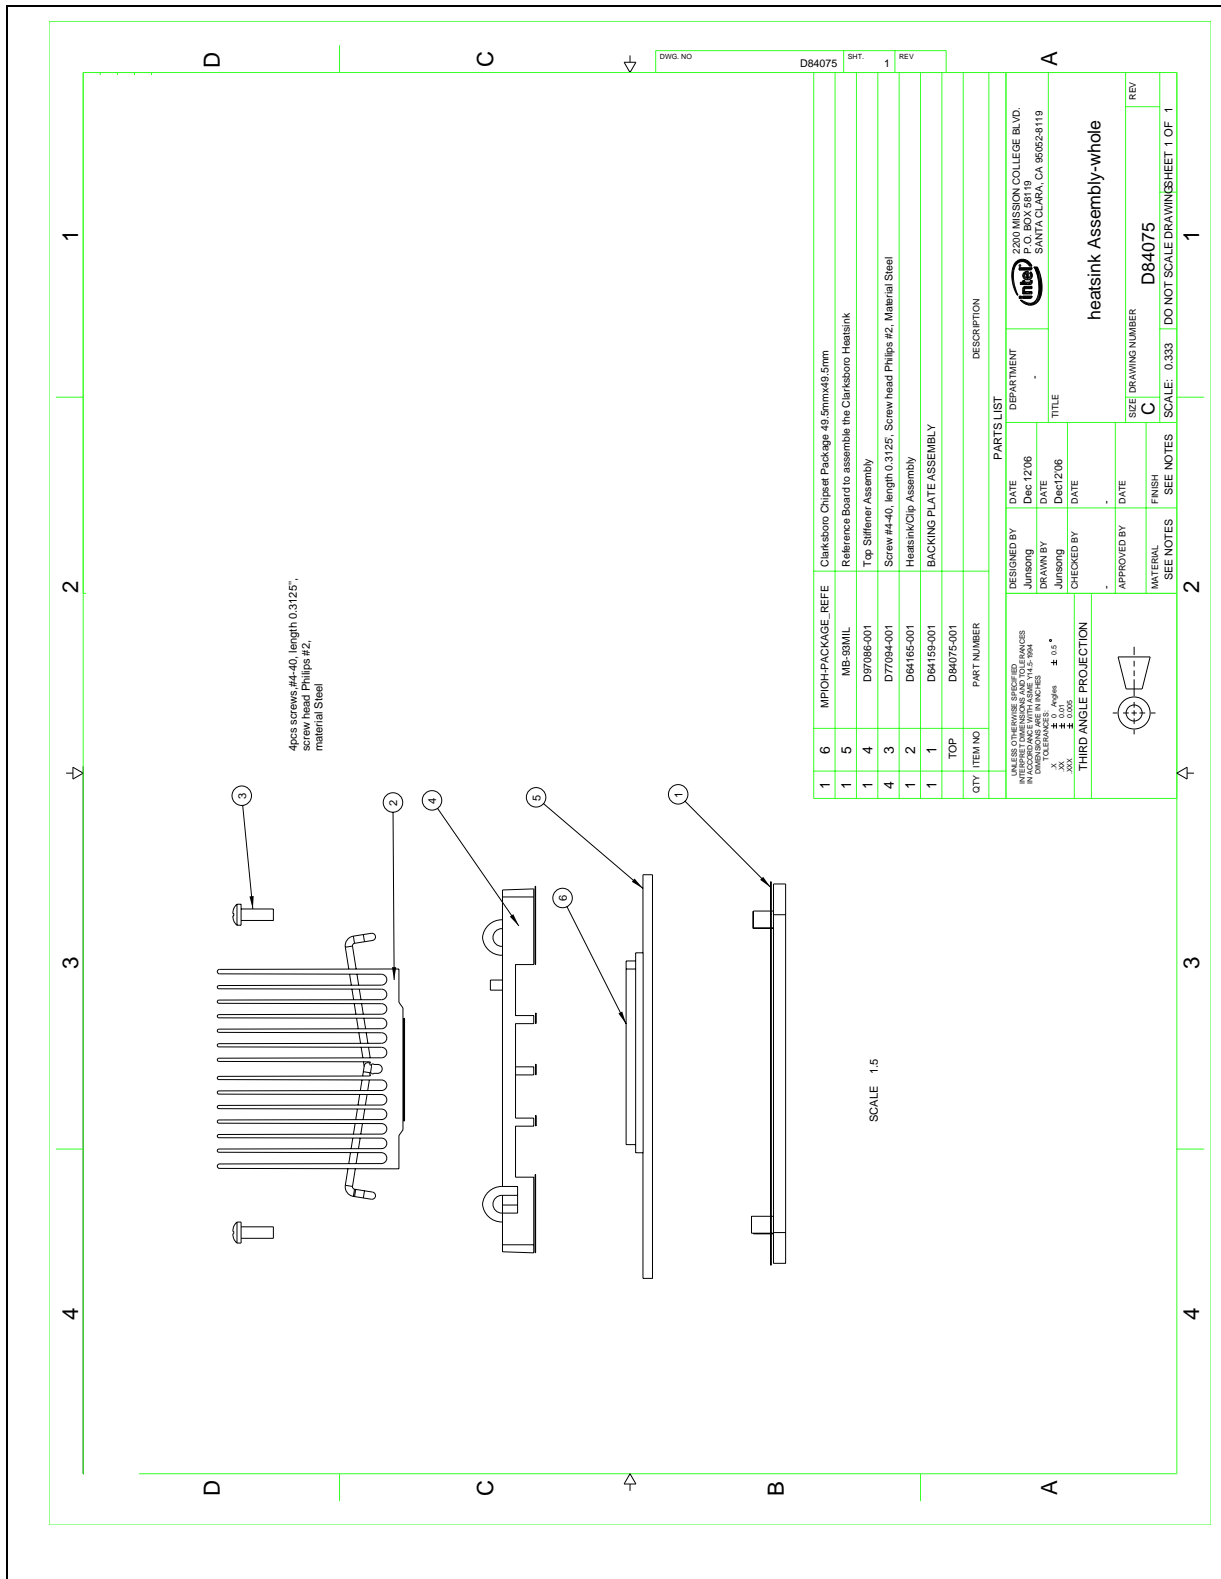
Intel 7300 Chipset MCH Heatsink Drawing (1 of 3)
